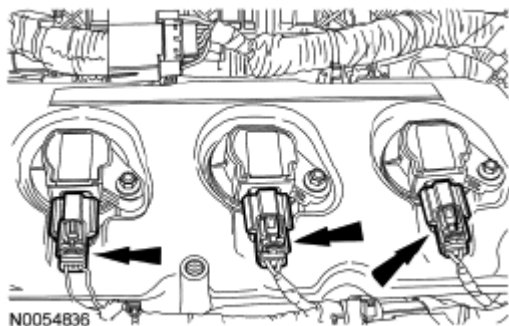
Locating LH Coil-On-Plug Electrical Connectors
